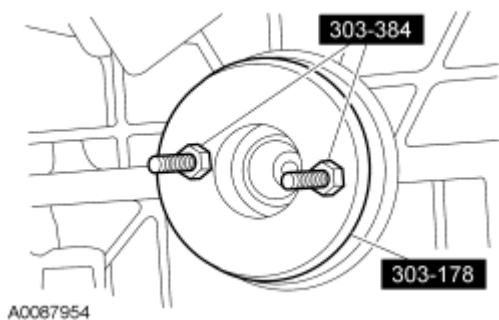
Identifying Special Tools (303-384 And 303-178)
